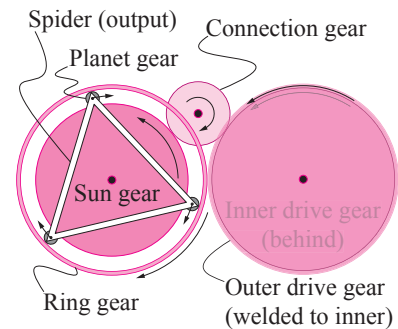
A high-gain planetary gear system, so named because the ‘planet’ gears go around the ‘sun’ gear. Often planetary gears depend on the sun or the spider or the ring not rotating. In this design, all three rotate. A CCW torque is applied to the inner drive gear which is welded to the outer drive gear (they are concentric and have nearly the same radius). The outer drive gear turns the ring gear CW. The inner drive gear turns the sun gear CCW. The three planet gears spin between the inside of the ring gear and the outside of the sun gear. As drawn, this motion would be *much* slower than the motion of the drive gears.
